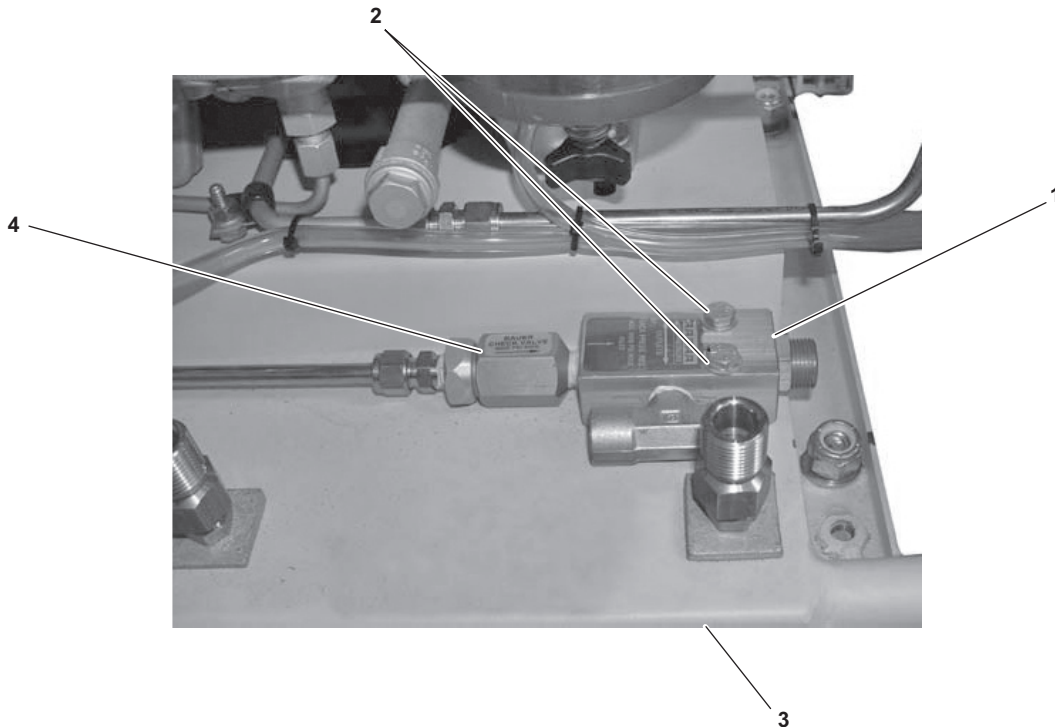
Bolts Securing Pressure Maintaining Valve
